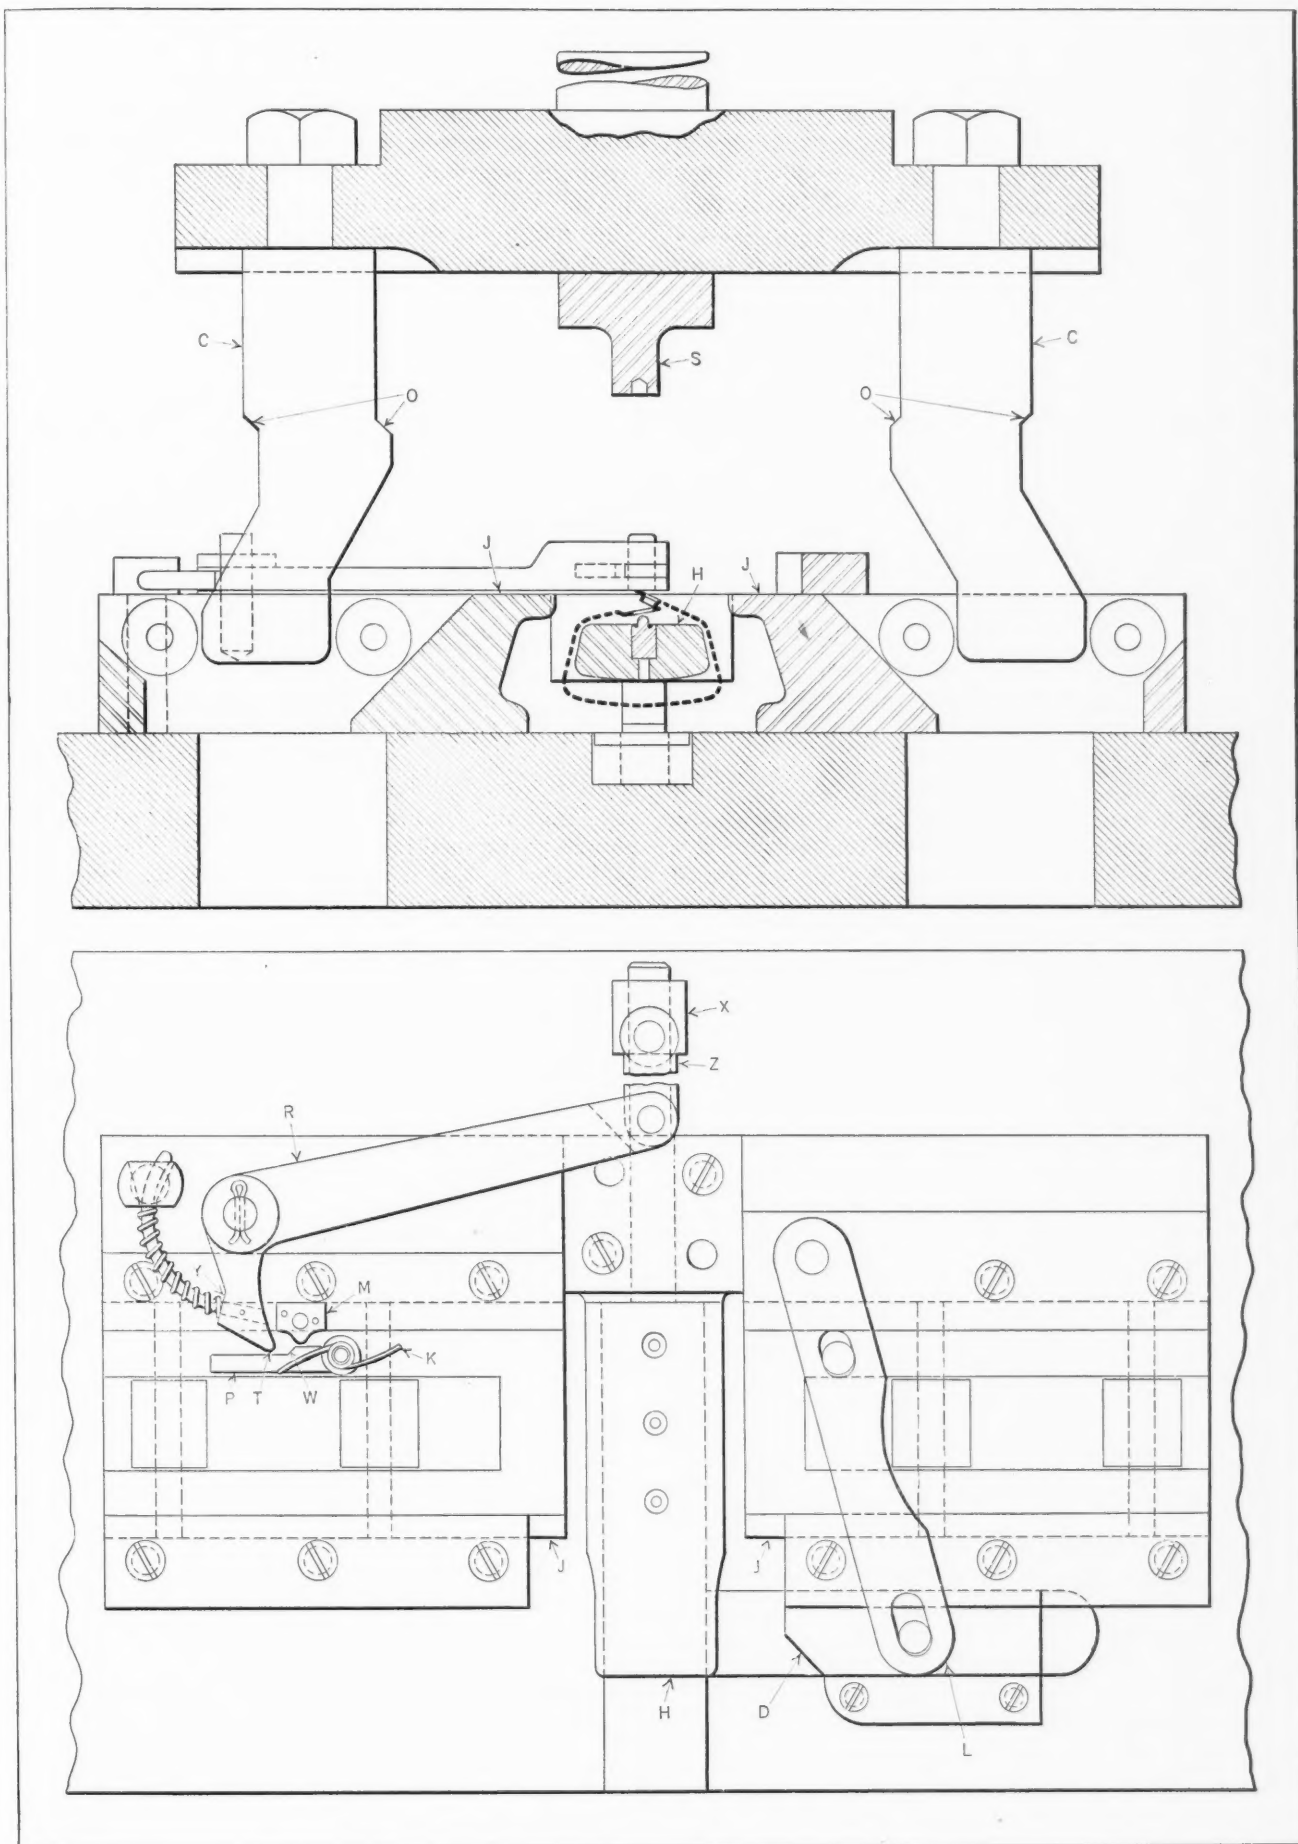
Die in which Part Shown in Fig. 1 is Riveted and then Automatically Ejected
